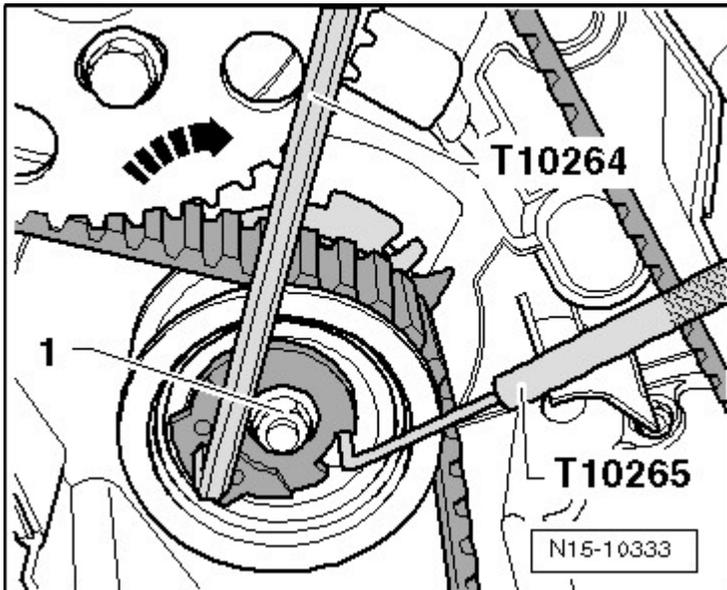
Identifying Long Reach T10264 And Locking Tool T10265
